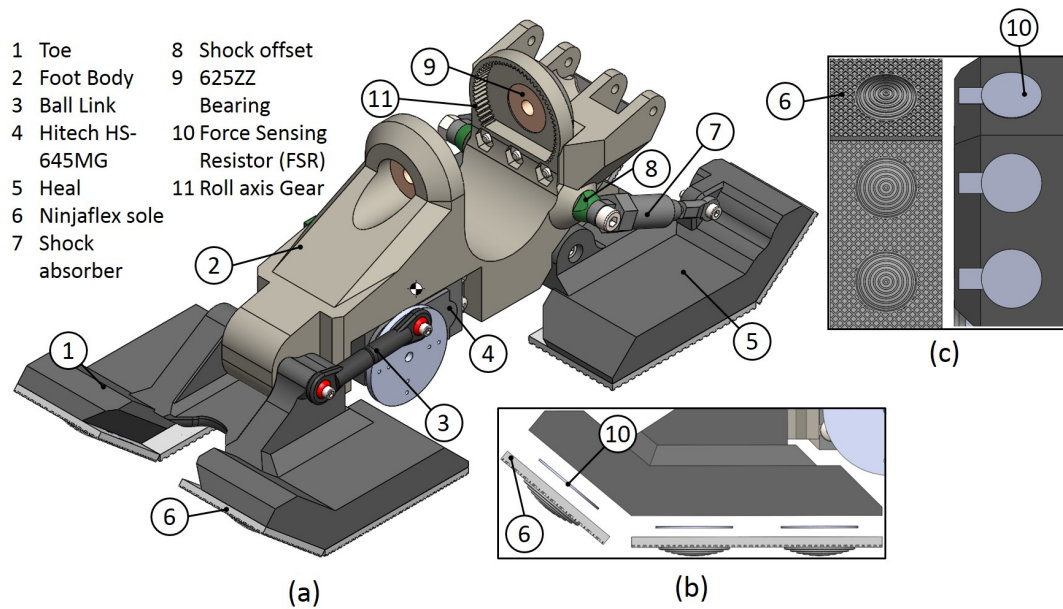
(a) Foot Assembly (b) Exploded view of Toe (c) Bottom view of the Toe with Ninjaflex sole (Left) and FSR (Right)
